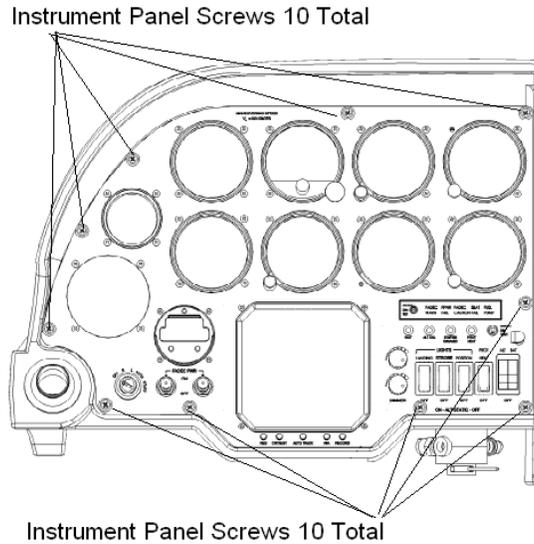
Location of the Ten Screws Securing The Instrument Panel
